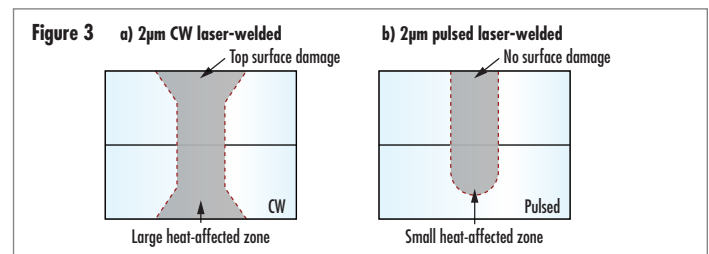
Pulsed lasers should be used for highly precise plastic welding due to the smaller amount of surface damage
